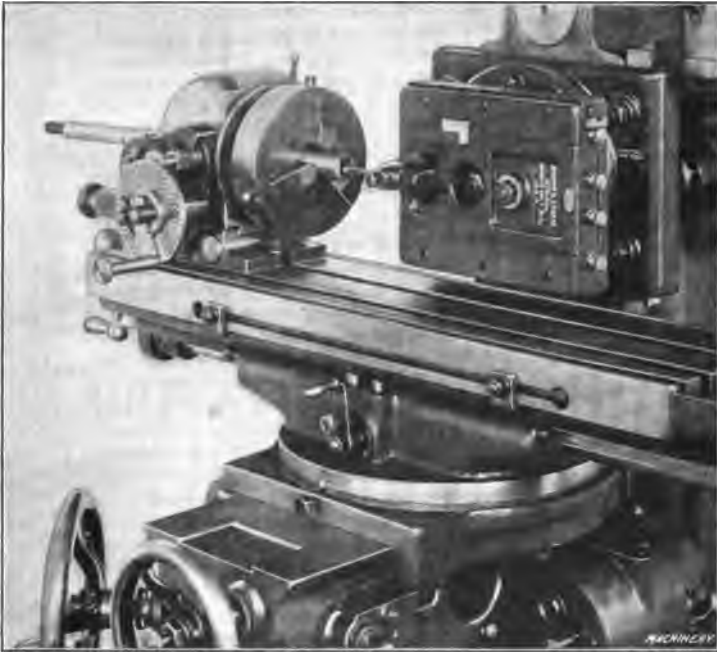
Slotting Attachment finishing Square Hole in Long Rod held in Spiral Head
